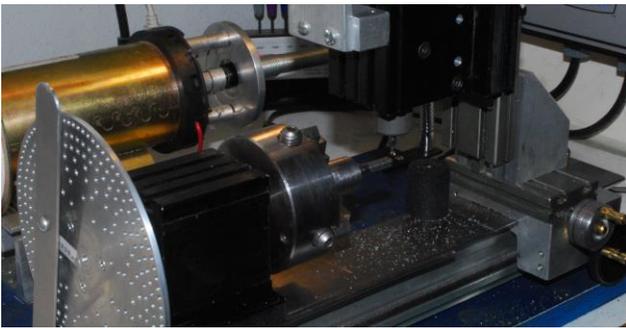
Milling the flats on the winding arbor. Several light passes work well to avoid chatter.
